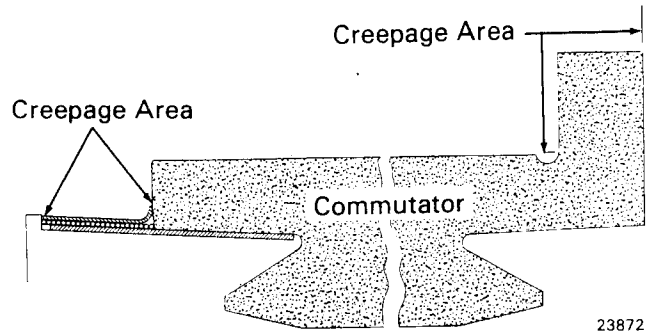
Creepage Areas On Commutator With String Band Covering And TIG Welded Terminations
